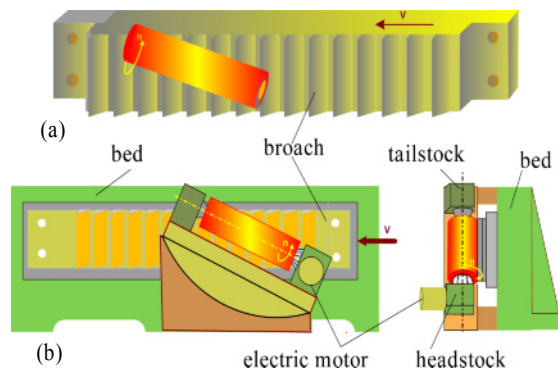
Schematic illustration of (a) -broaching a preheated cylindrical billet; (b) – a version of roto-broaching machine tool
